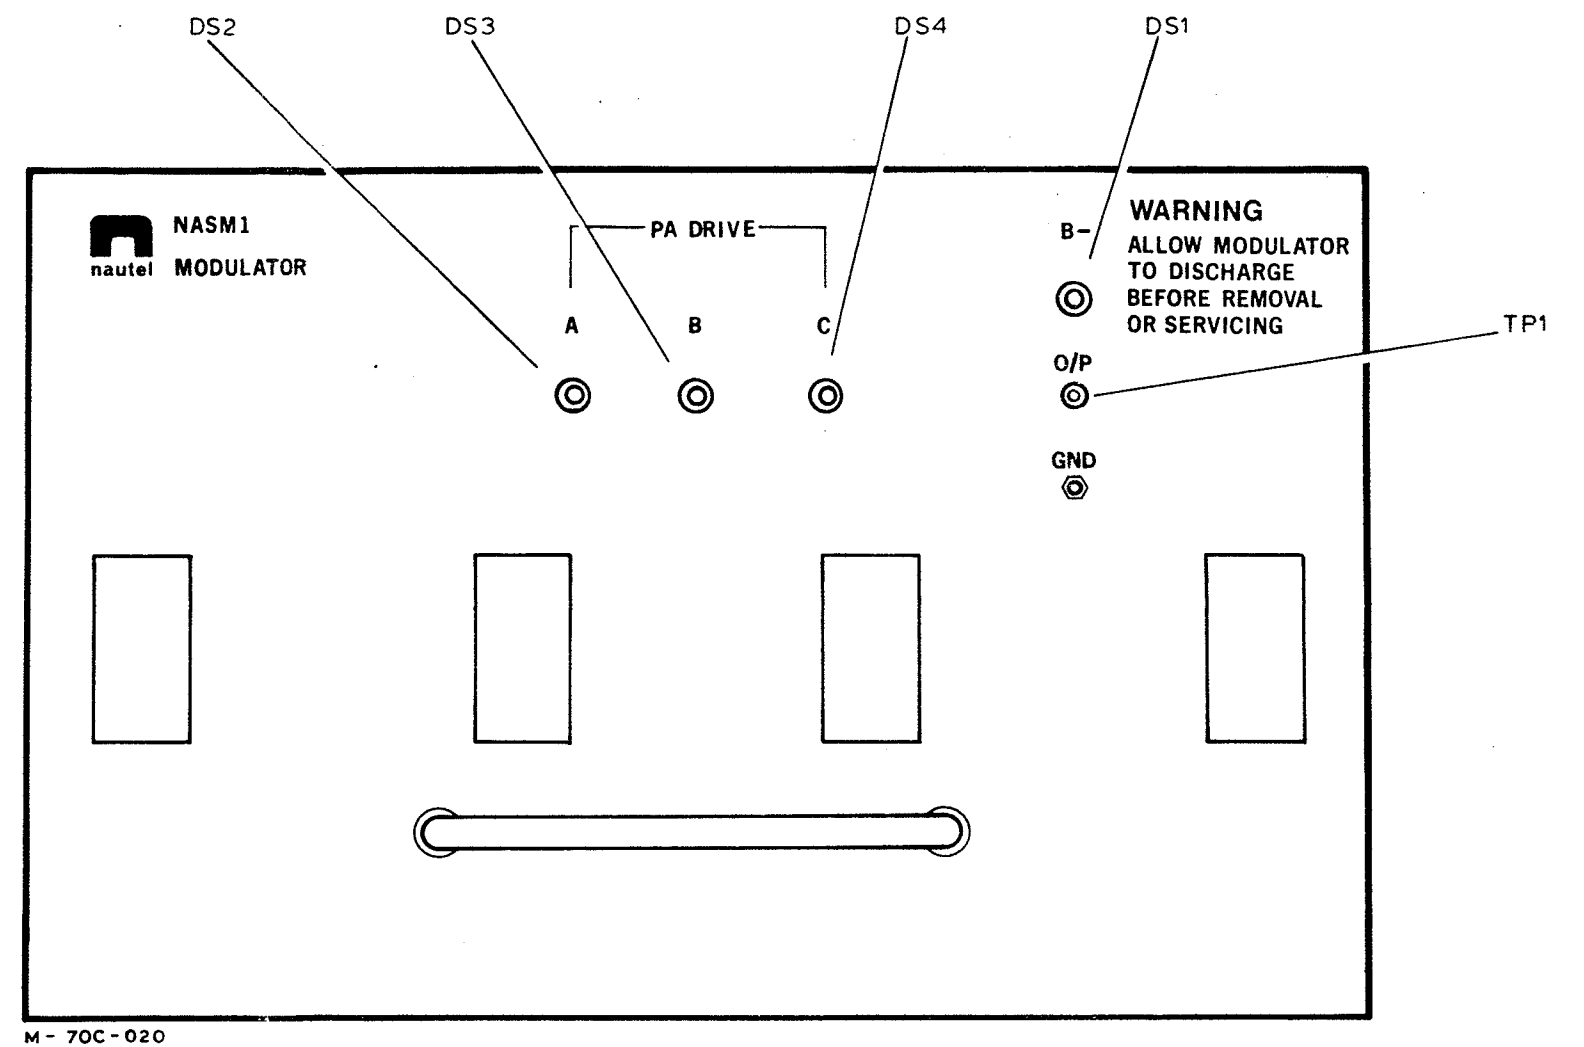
Assembly Detail - NASM1A Modulator Module (Front View)
